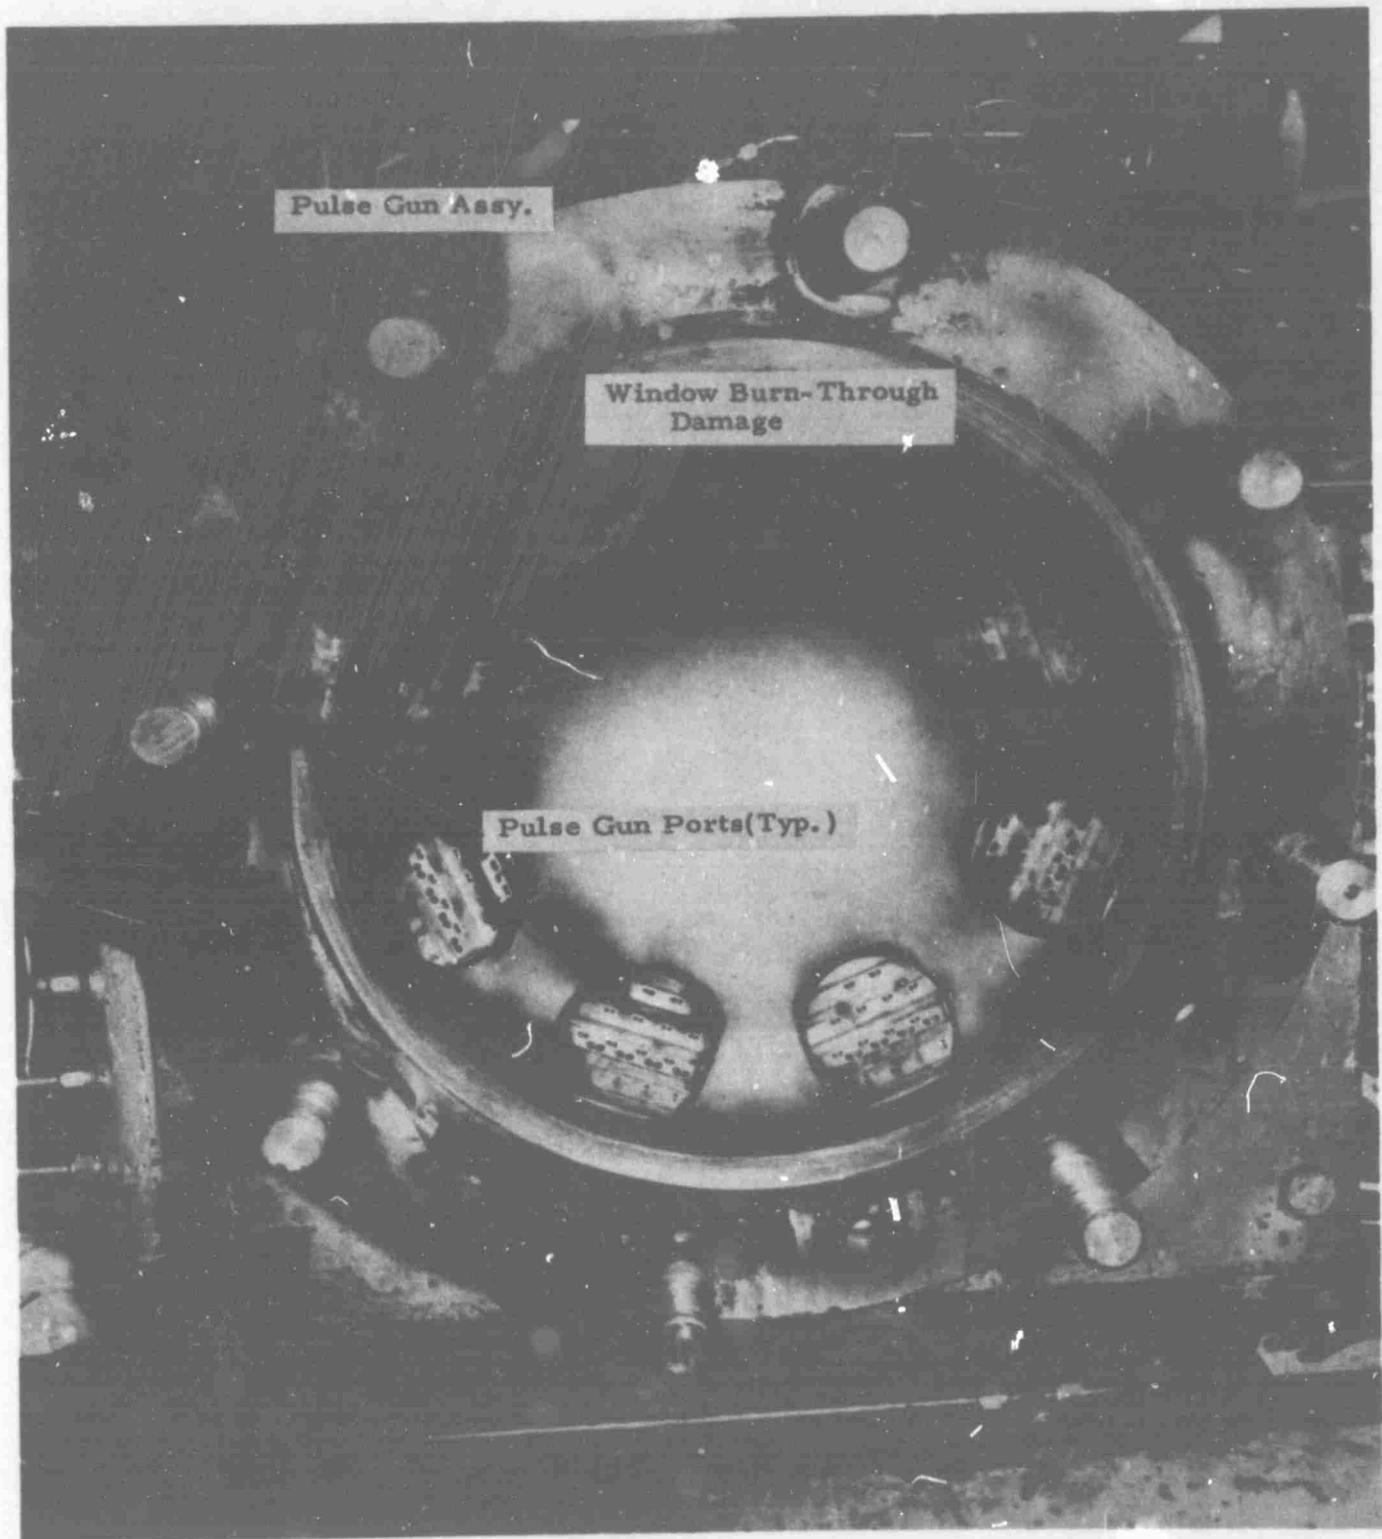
15" Diameter, Pulse Motor Dished Injector Head
